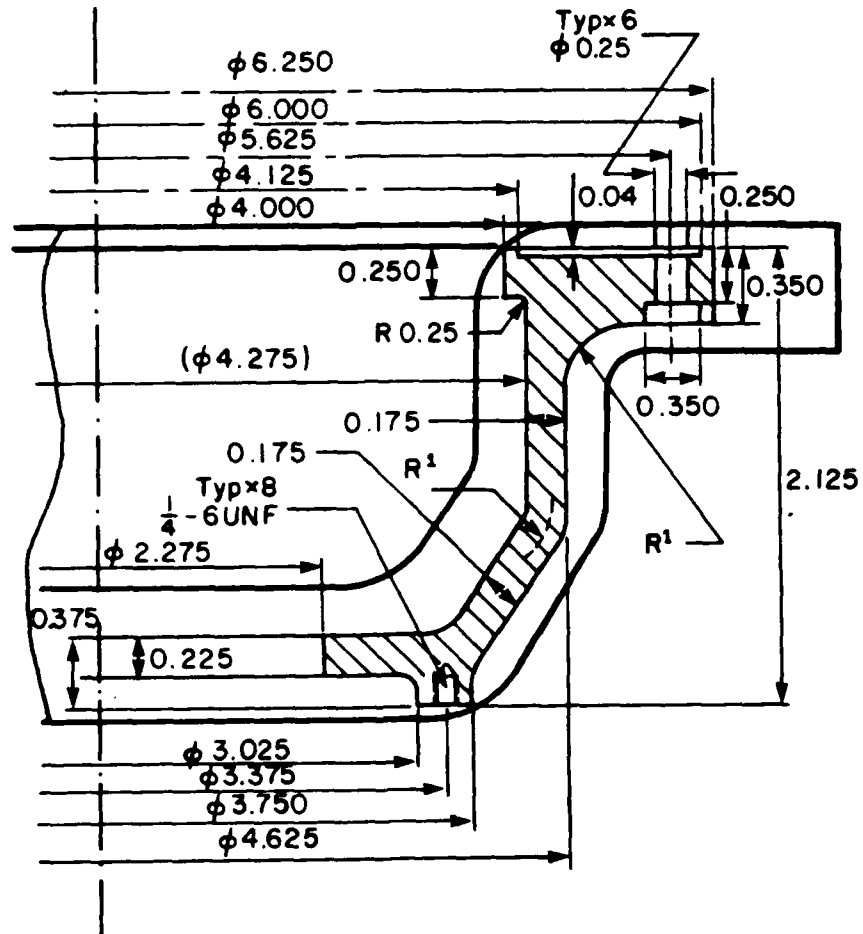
Part manufactured by a combination of drawing and machining processes
